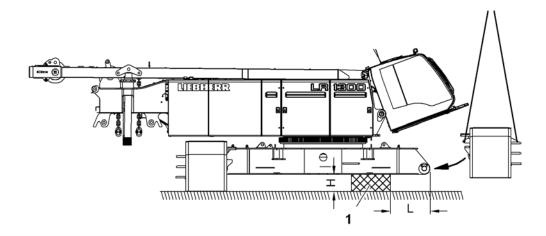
Attaching the second crawler side frame without a self-assembly system
